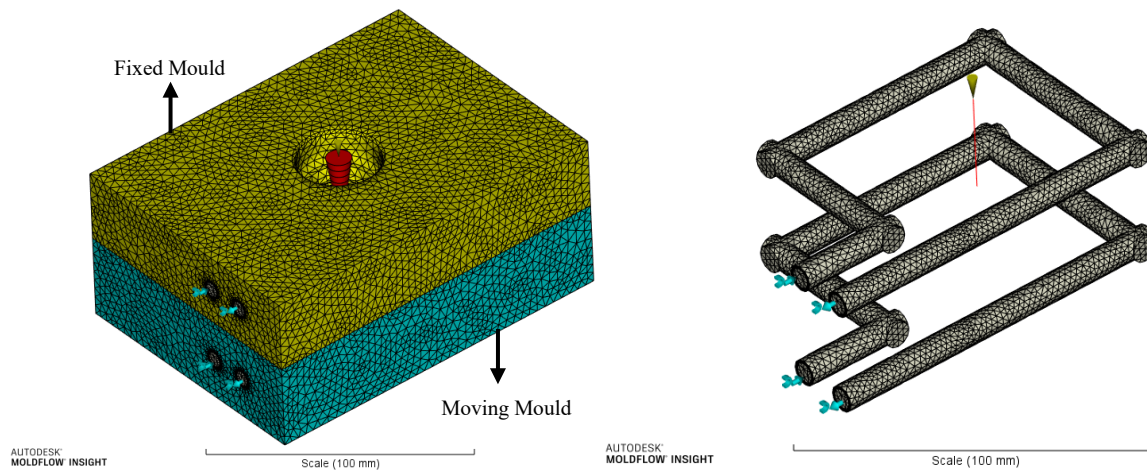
The 3D meshed of moulds and conventional cooling channels
